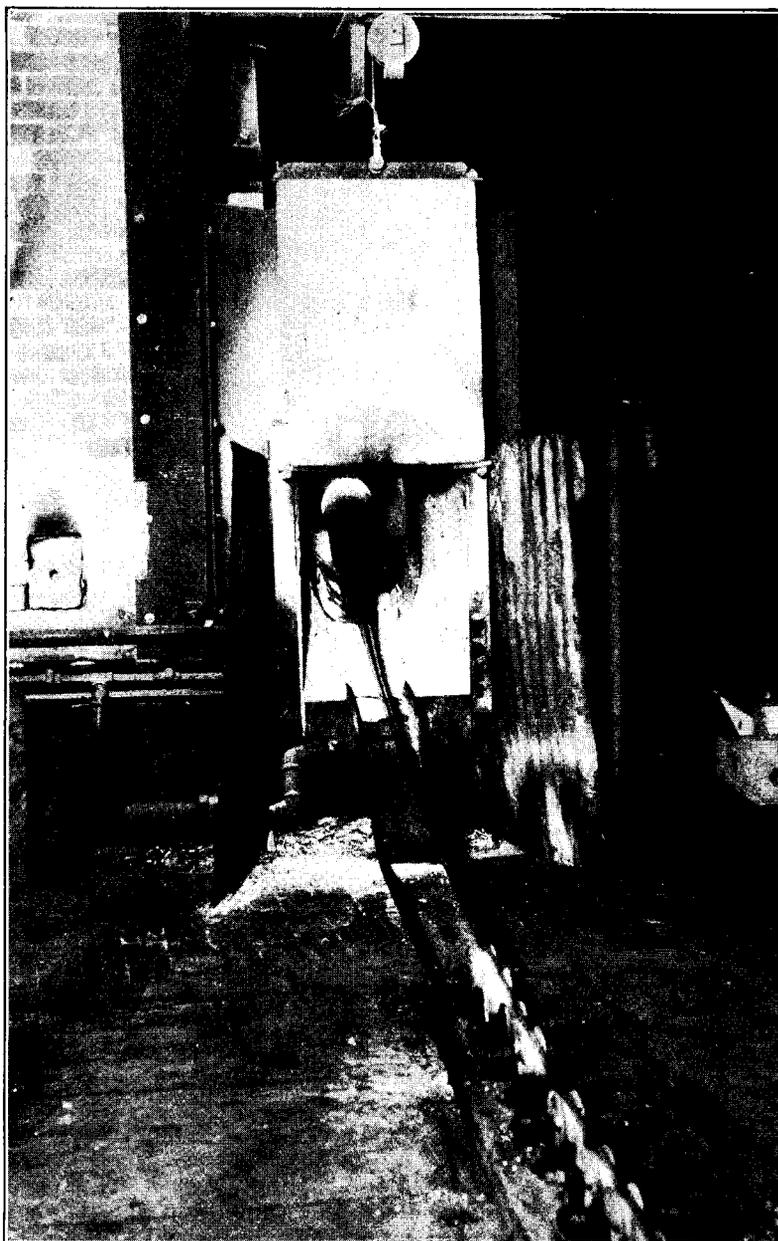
DANNER DRAWING MACHINE: DRAWING FURNACE
